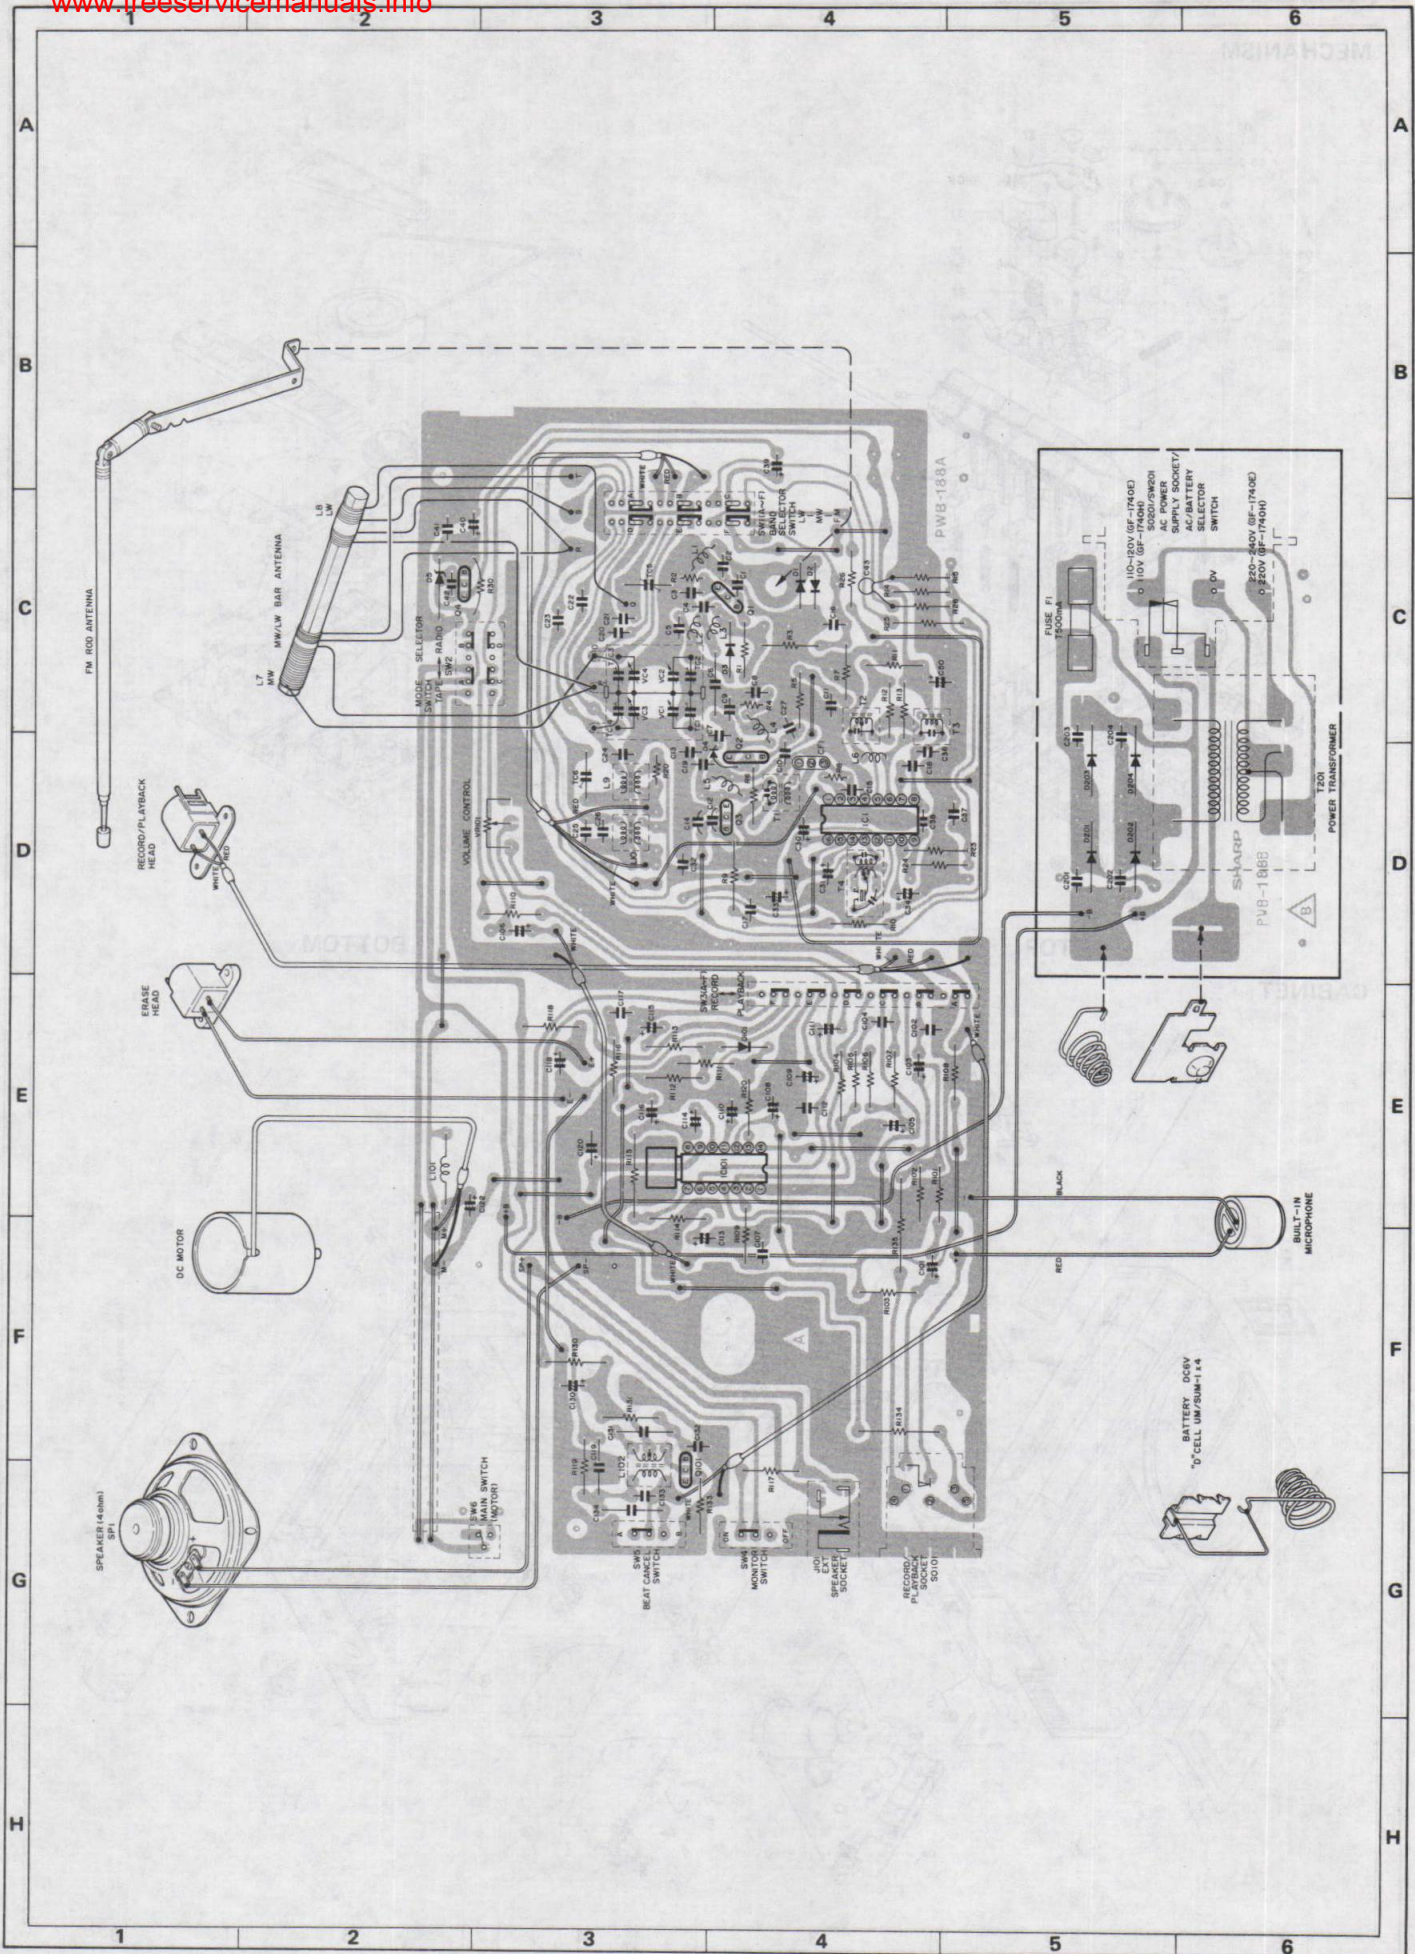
WIRING SIDE OF PRINTED WIRING BOARD
